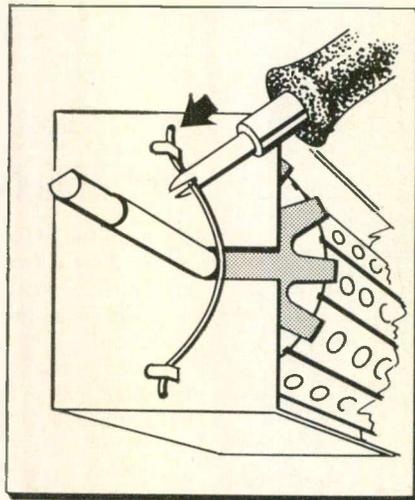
Slightly spread forked soldering aid holds on to "jumpy" turret tuner retaining springs.
